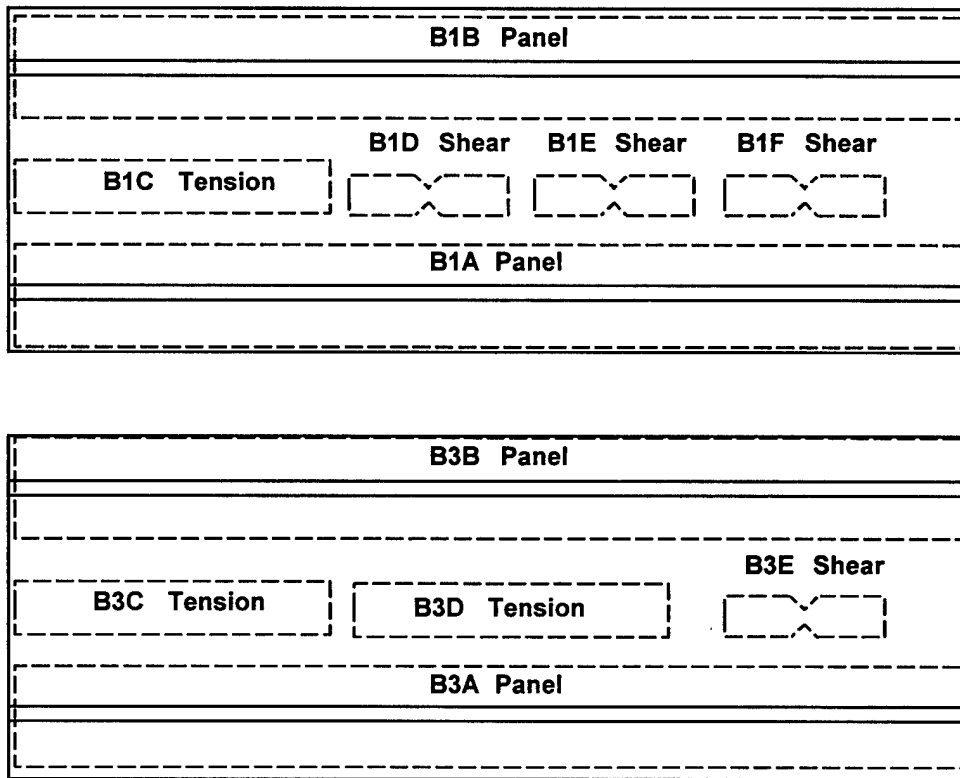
COUPON TEST AND PANEL TEST SPECIMEN LAYOUT ON THE TWO-BLADED STIFFENED BRAIDED PANEL
